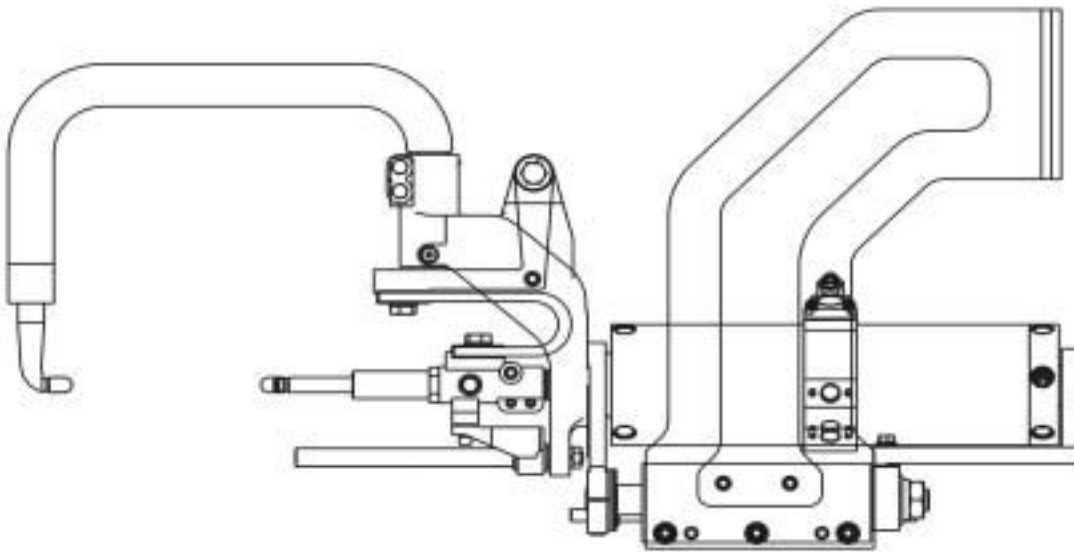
Robot Style, C-Type Gun wo/Transformer
